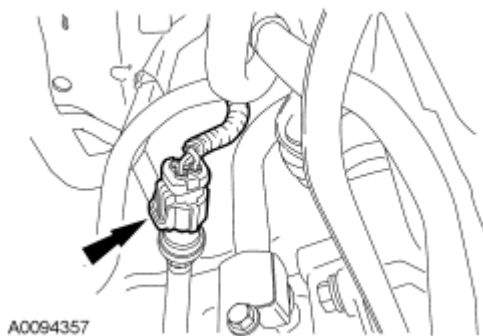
Locating A/C High-Pressure Switch Electrical Connector
